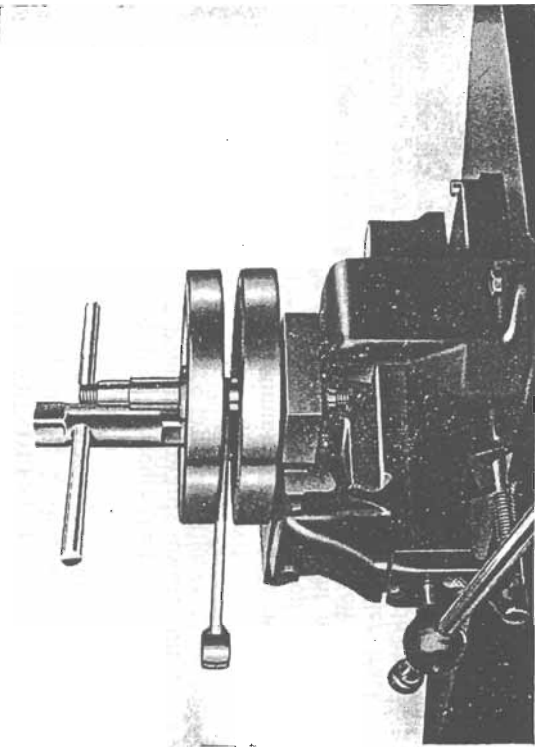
FLYWHEEL MOUNTED ON BLOCK.
